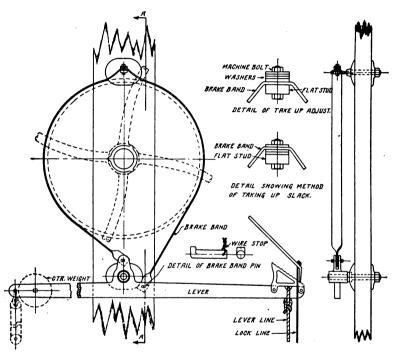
Construction of Steel-Band Type of Elevator Brake
